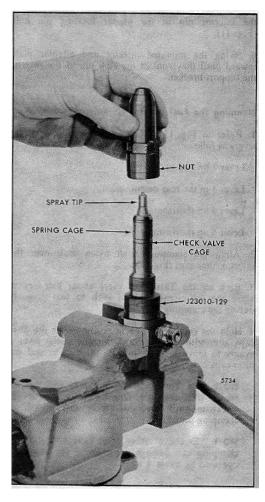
Assembling Injector Valve Parts on Tip Tester Adaptor J 23010-129
